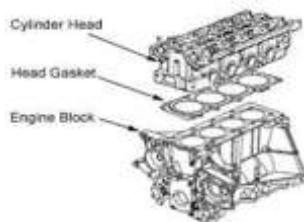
View of Engine comprising of Head, Gasket and Block
